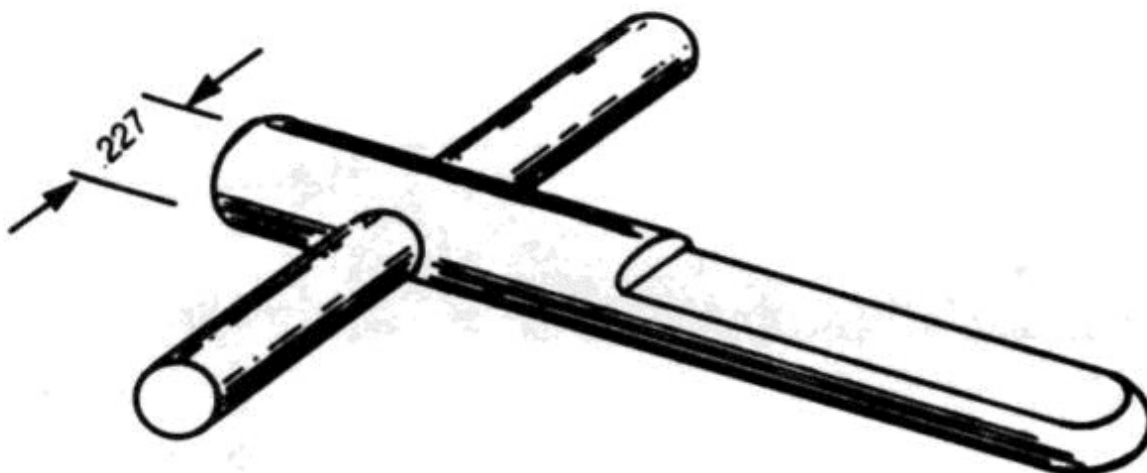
Twenty-two caliber ironing tool for removing burrs in chambers. To use, slide the tool into the chamber, using moderate force, and rotate it. The flat blade slide pushes the burrs back into position.
